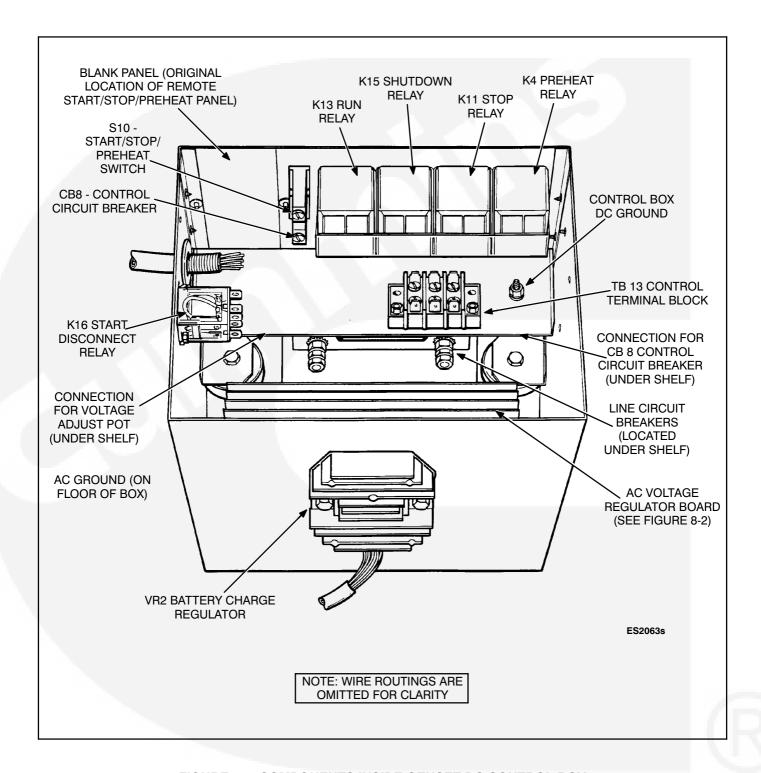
COMPONENTS INSIDE GENSET DC CONTROL BOX
